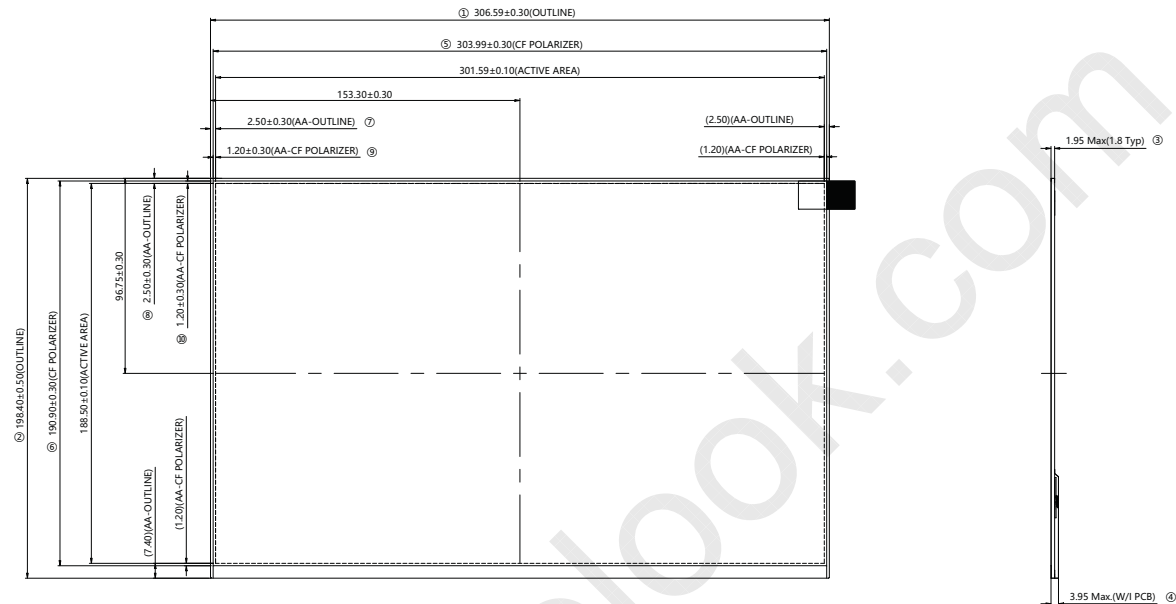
TFT-LCD Module Outline Dimension (Front View)
